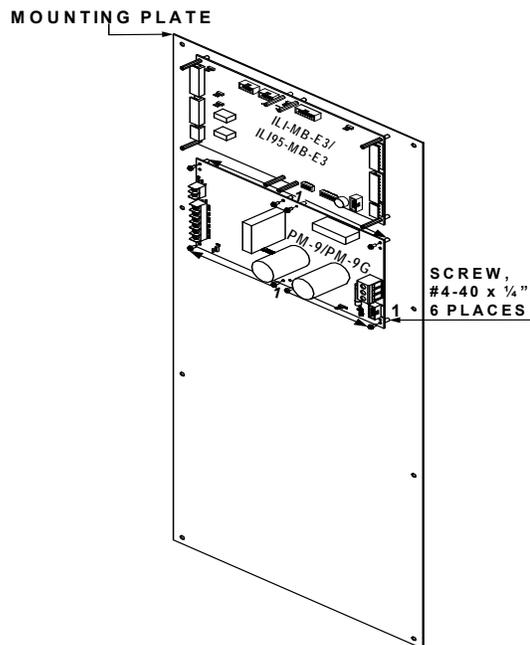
PM-9G Installed to a Mounting Plate
